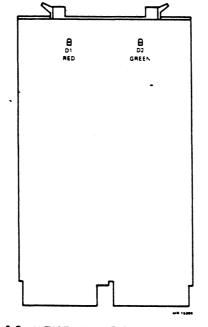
MINIMUM LOAD MODULE LAYOUT
